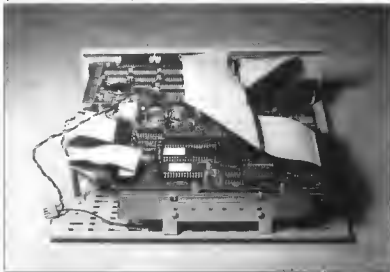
The final assembly. Here, you can see the controller board (with cables connected) mounted above the shield.
